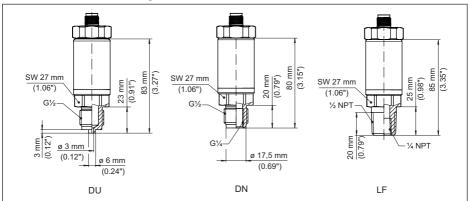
VEGABAR 18, threaded fitting not front-flush
